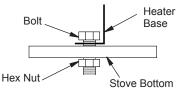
Fastening Heater Base to Stove Drop Bottom
